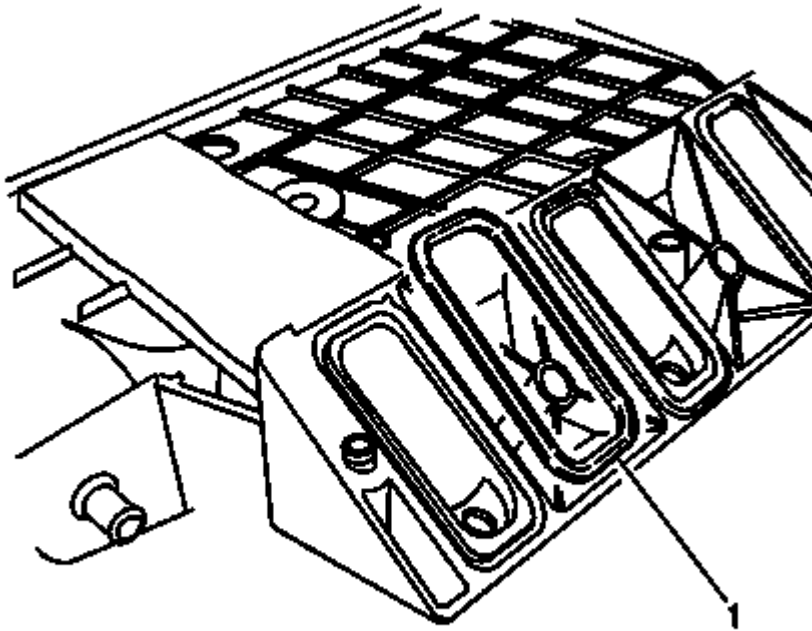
Identifying Intake Manifold To Cylinder Head Gaskets
